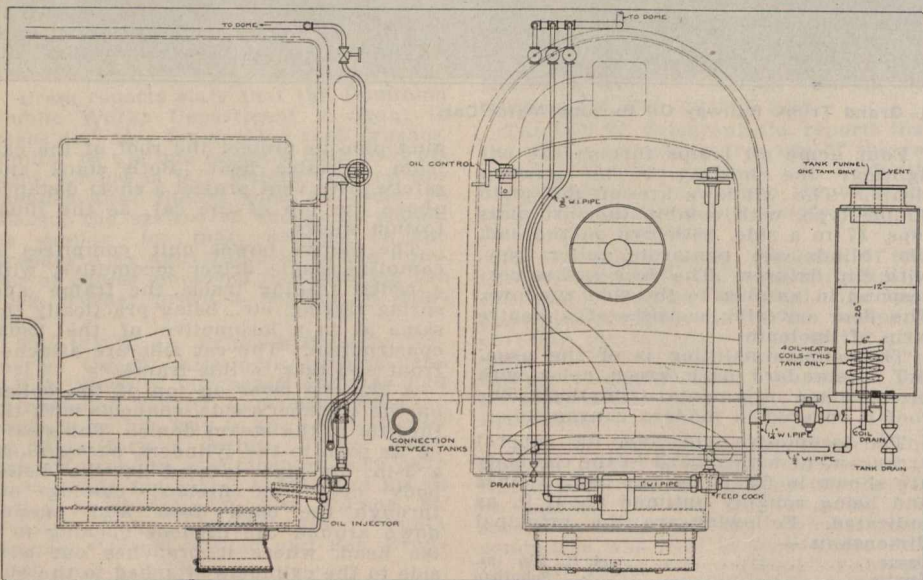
Oil Piping on the Boiler, showing Location of Oil Injector.
